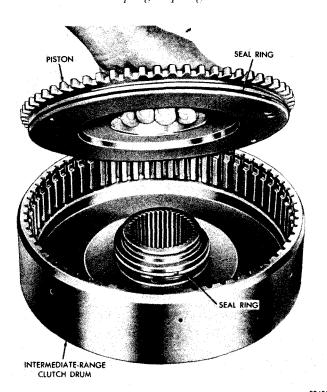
Removing (or installing) intermediaterange clutch piston assembly
